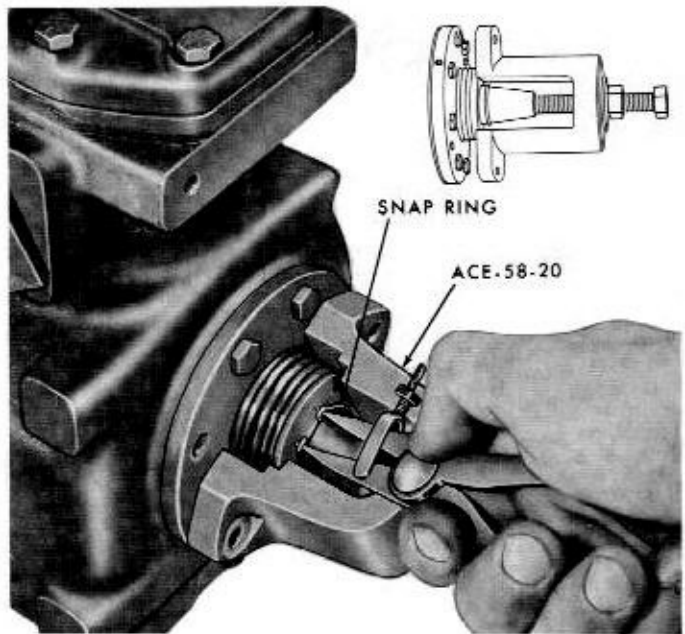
Removing the Compressor Shaft Snap Ring
